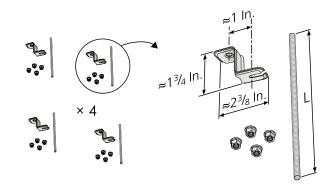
Installation accessory SYST MS M8-1, ceiling mount and threaded rod.
